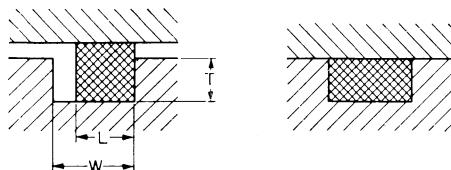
Gasket of square cross section sealed in rectangular cross section groove
